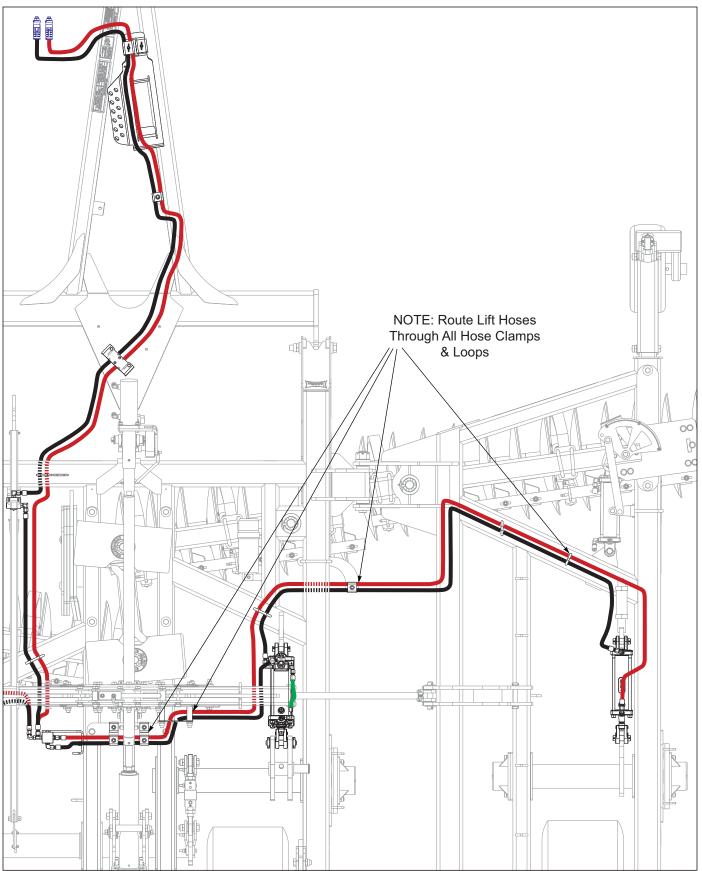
Lift Hydraulic Layout 7531-23'/26'/29' RH
